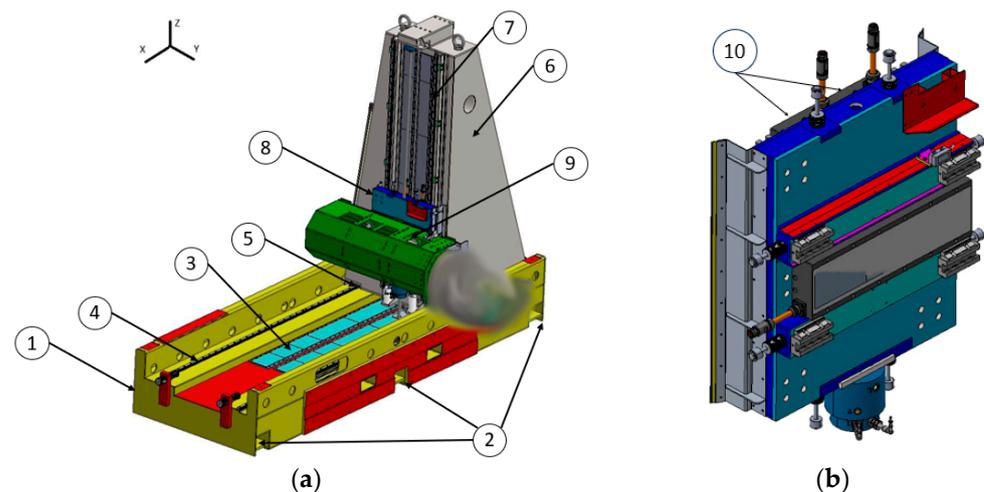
Cartesian robot prototype: (a) Overall machine; (b) Detail view of Z Carriage sub-assembly.
